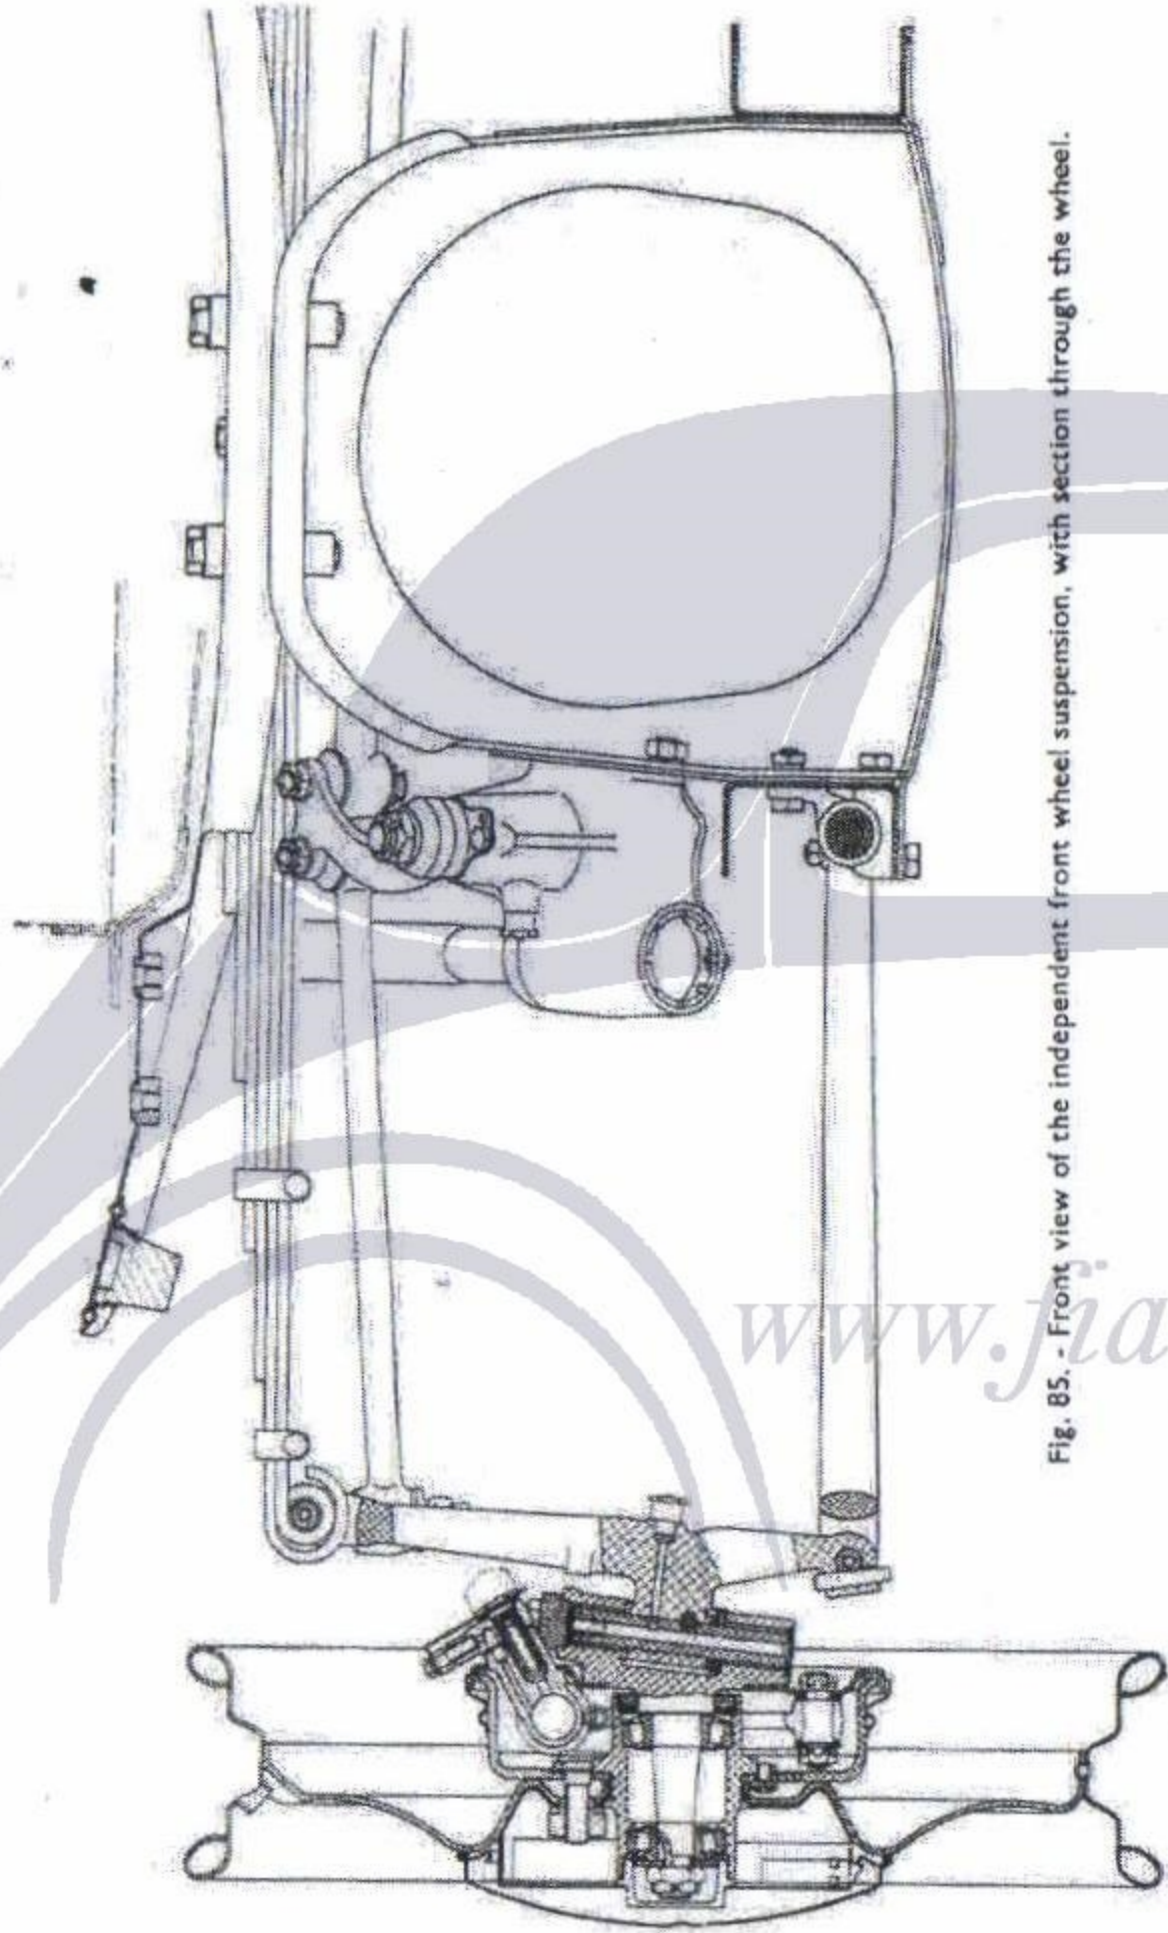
Front view of the independent front wheel suspension, with section through the wheel.
